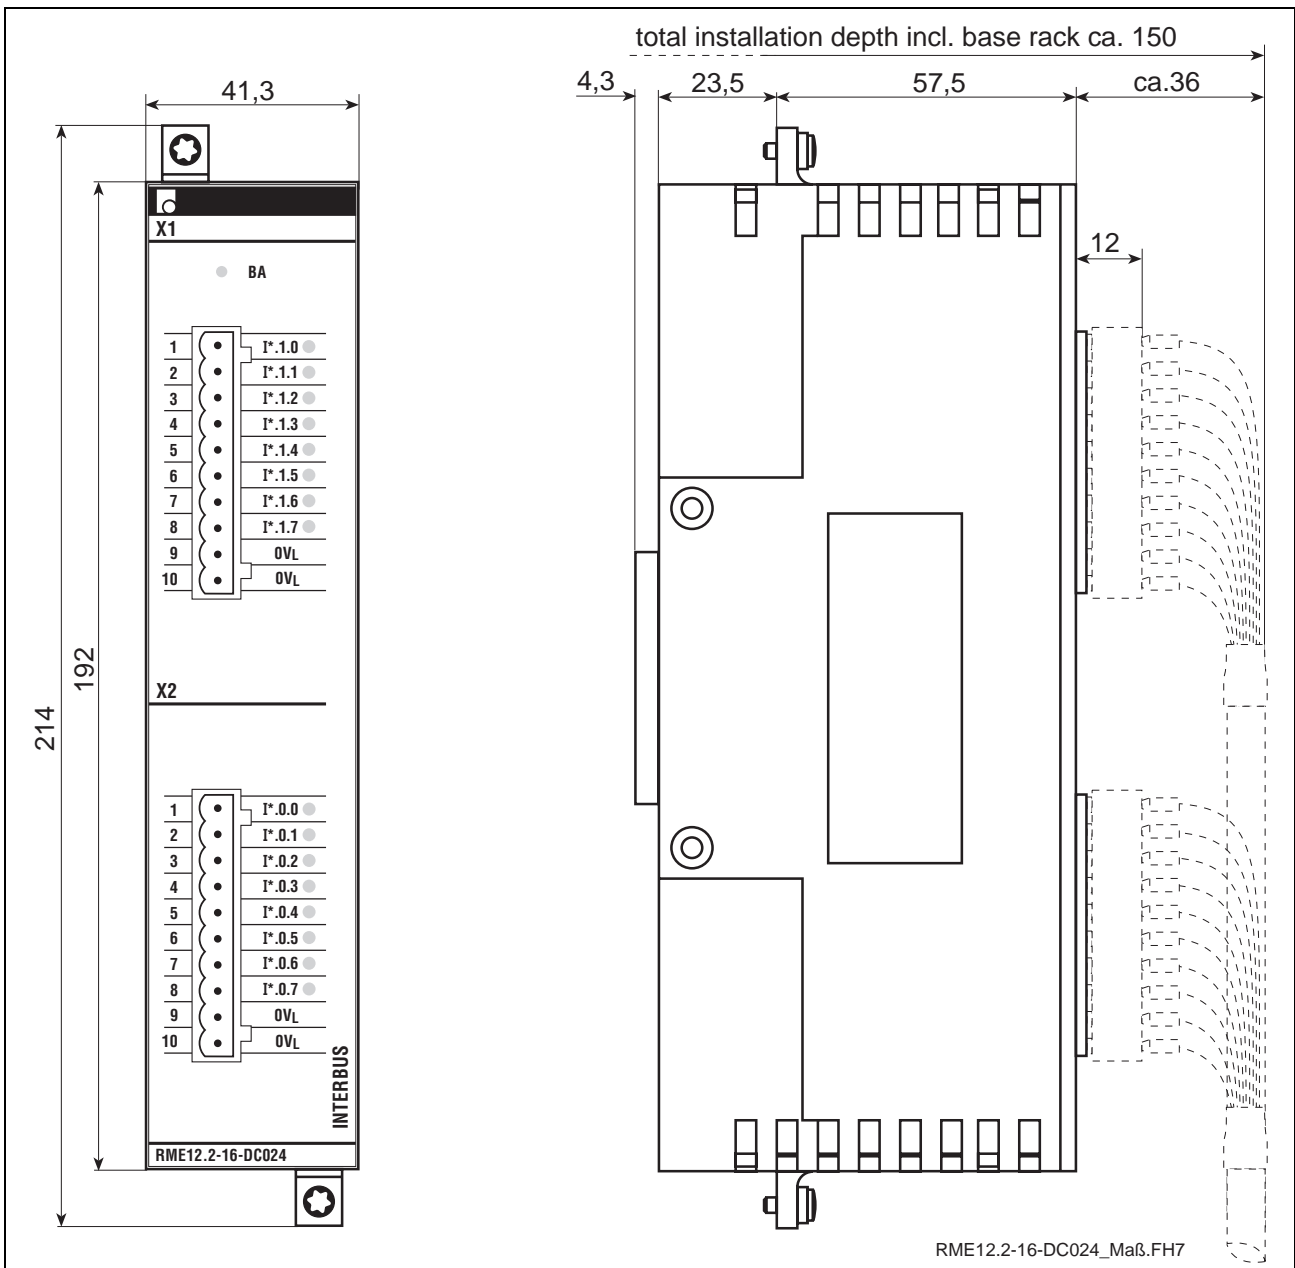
Mounting dimensions of RME12.2-16-DC024
